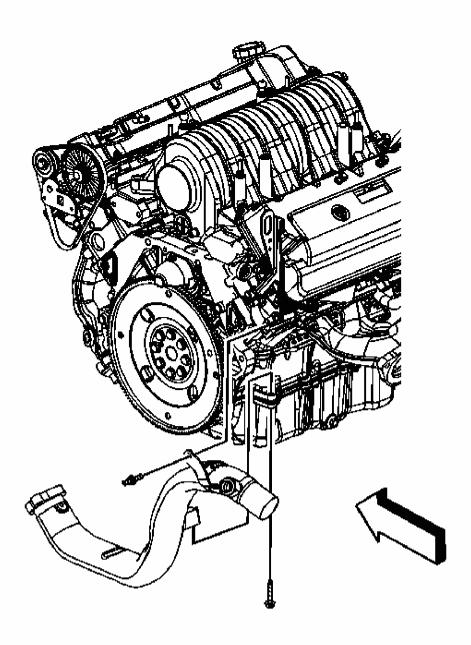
Identifying Front Exhaust Manifold Pipe Courtesy of GENERAL MOTORS CORP.
